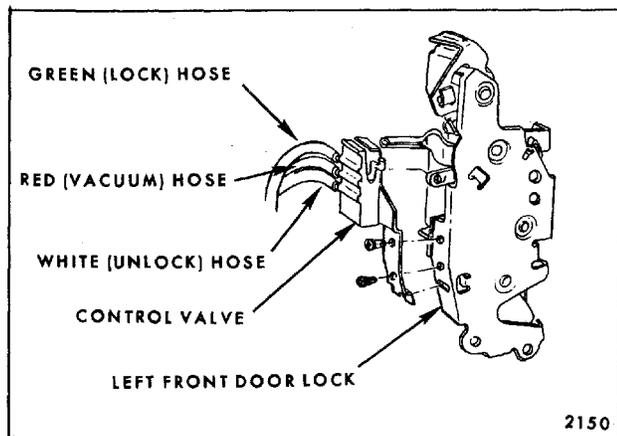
Vacuum Door Lock Control Valve - Pontiac Style
